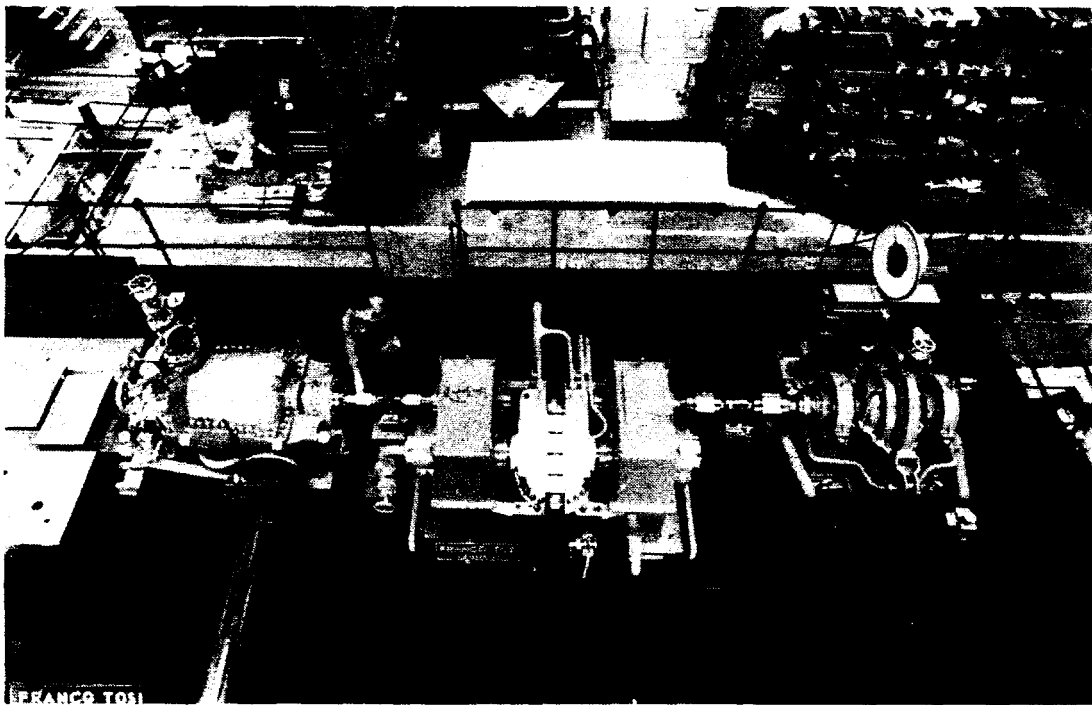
1 METRE FRANCO TOSI COUPLING TEST RIG BEING ASSEMBLED WITH ITS ASSOCIATED STEAM TURBINE, GEAR BOXES, AND BRAKE
